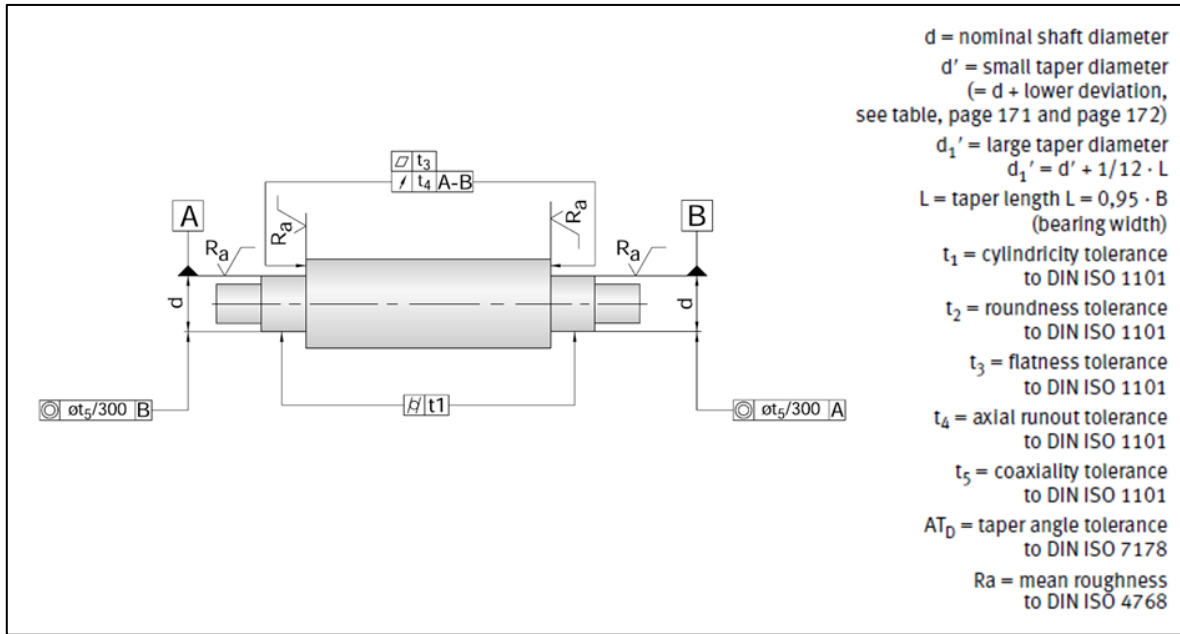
Typical Geometrical tolerance for spindle shaft (INA FAG, 2014, p. 39)
